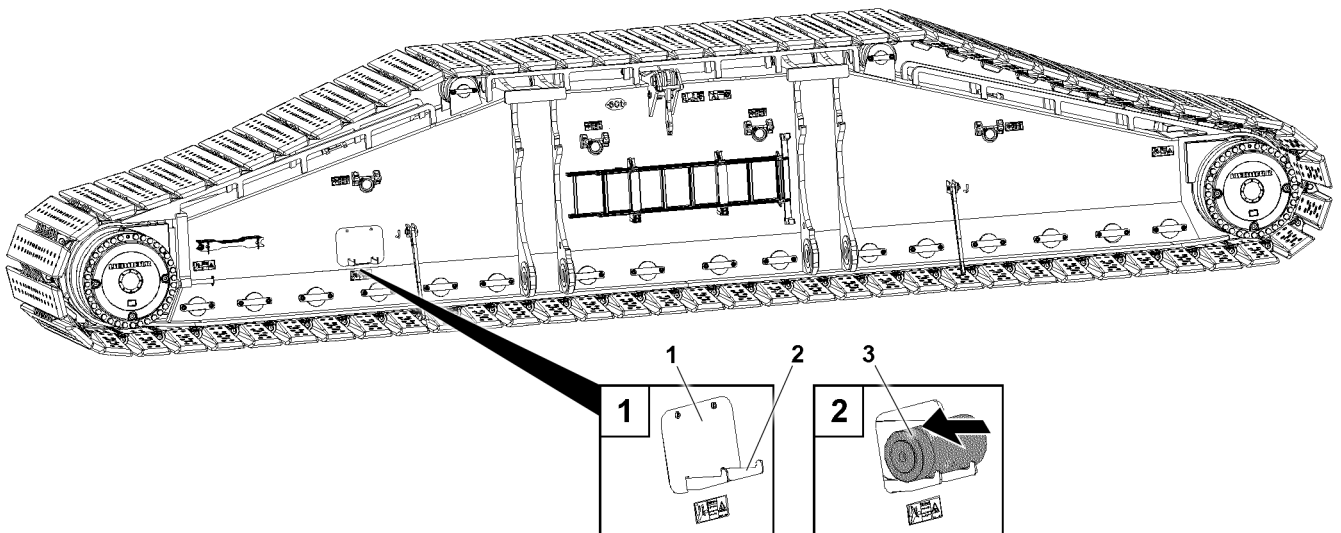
Inserting the tension cylinder in the crawler carrier opening
